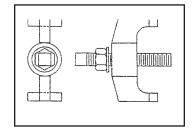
Tool 02-467006 torque to 90 ft lbs, (135 newton-meters)
